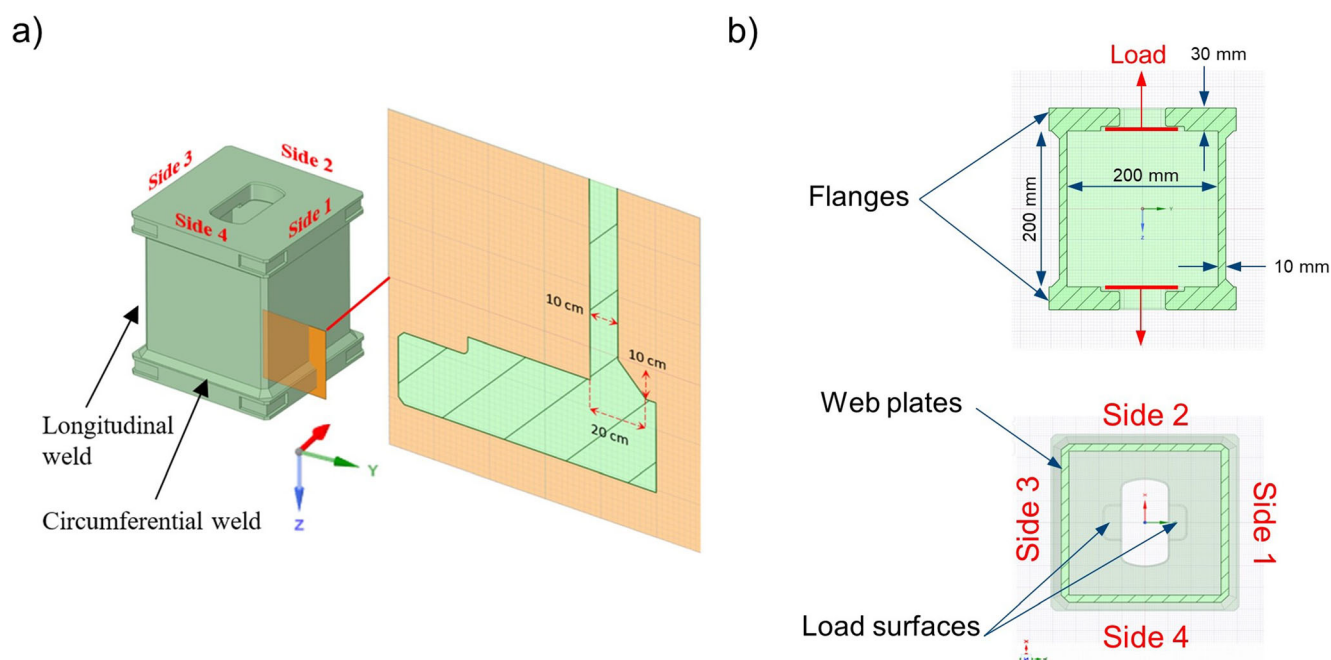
The welded box structure in (a) and applied load and dimension details in (b) [45].
